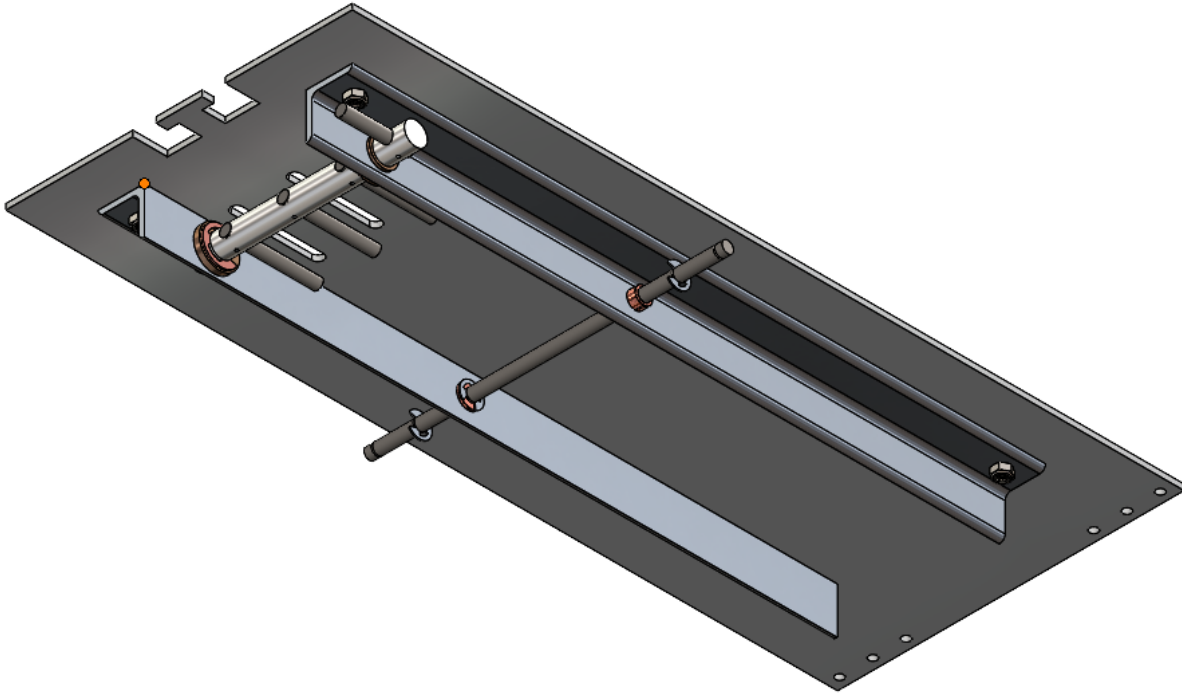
The 1/4" retaining rings assembled to the ramp shaft.
